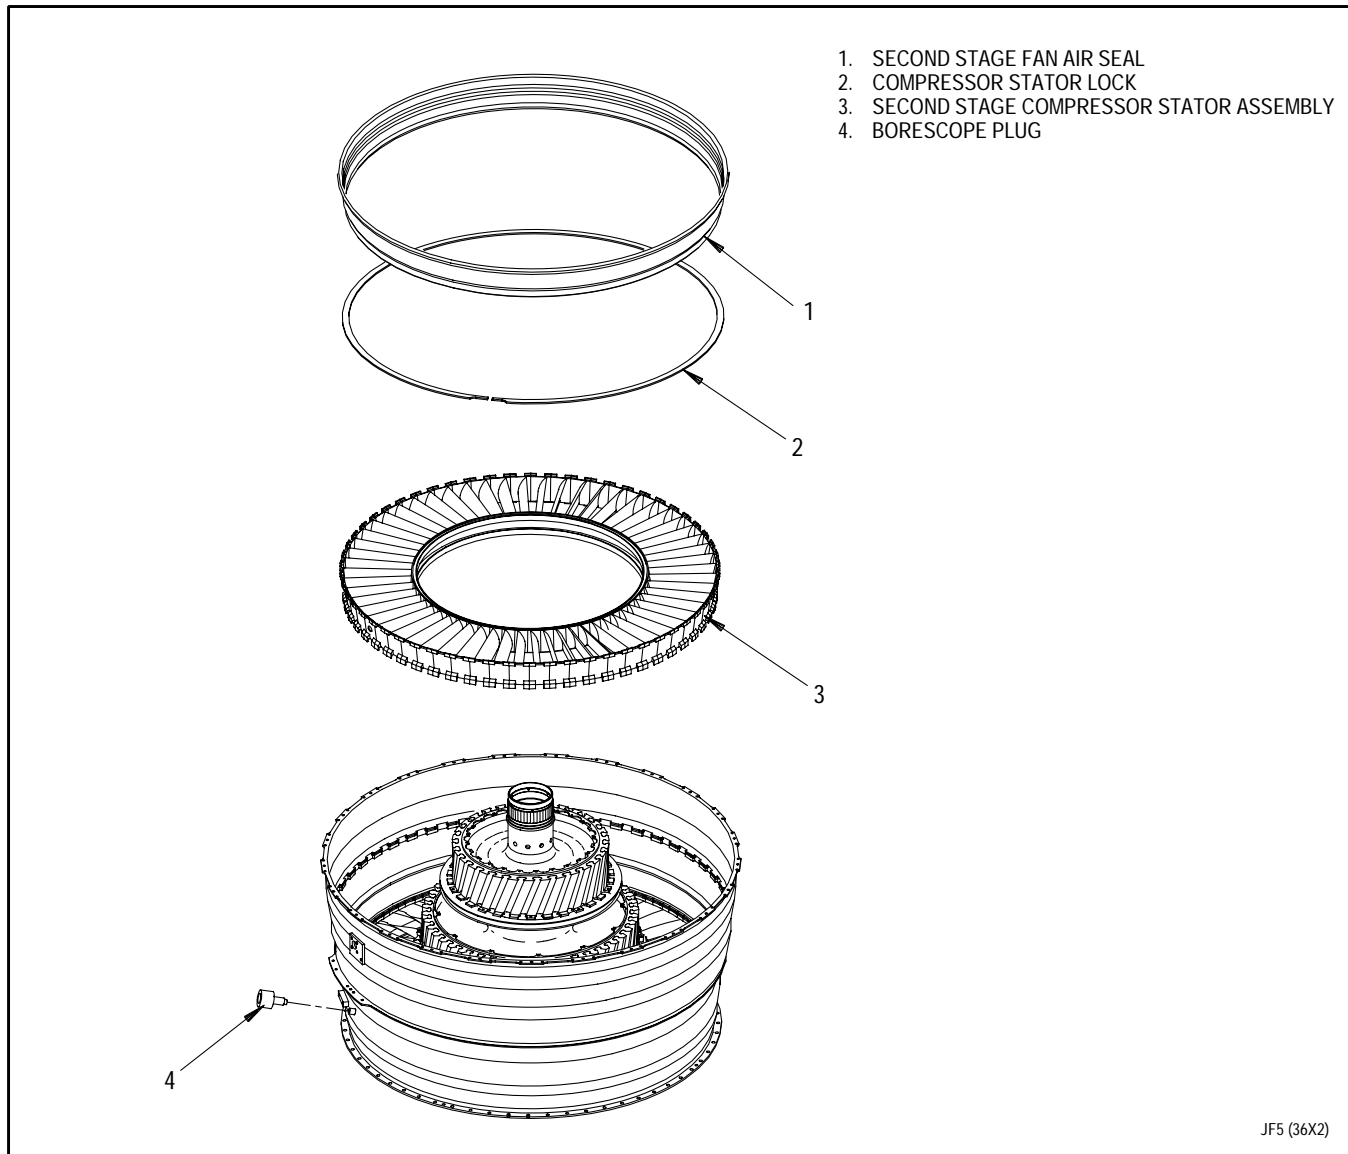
Second Stage Compressor Stator Assembly and Second Stage Fan Air Seal - Installation
